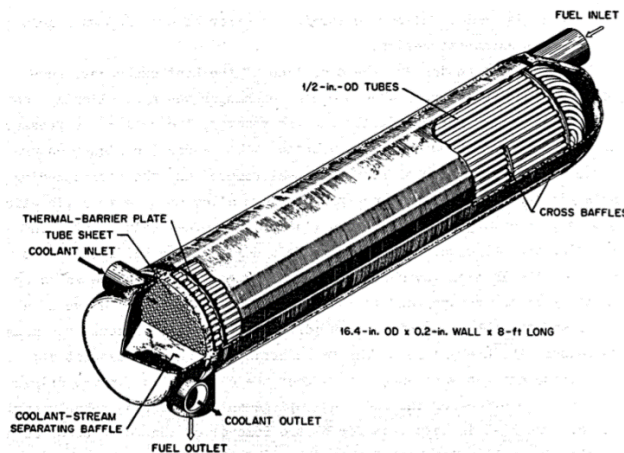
MSRE U-Tube Shell-and-Tube Heat Exchanger [6]
